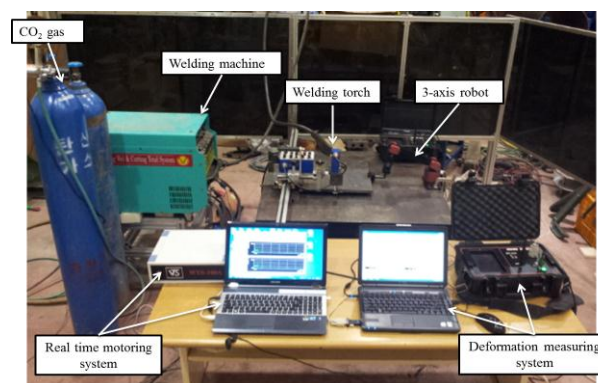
Multi-pass GMA welding experiment setup.
